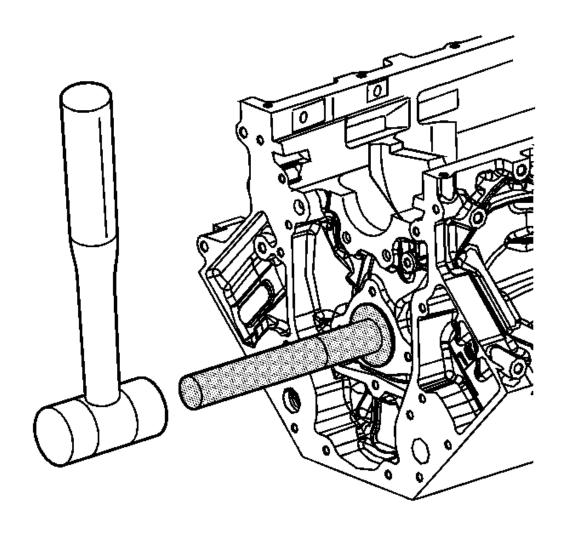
Driving Bearing Out Of Or Into Engine Block Courtesy of GENERAL MOTORS CORP.
